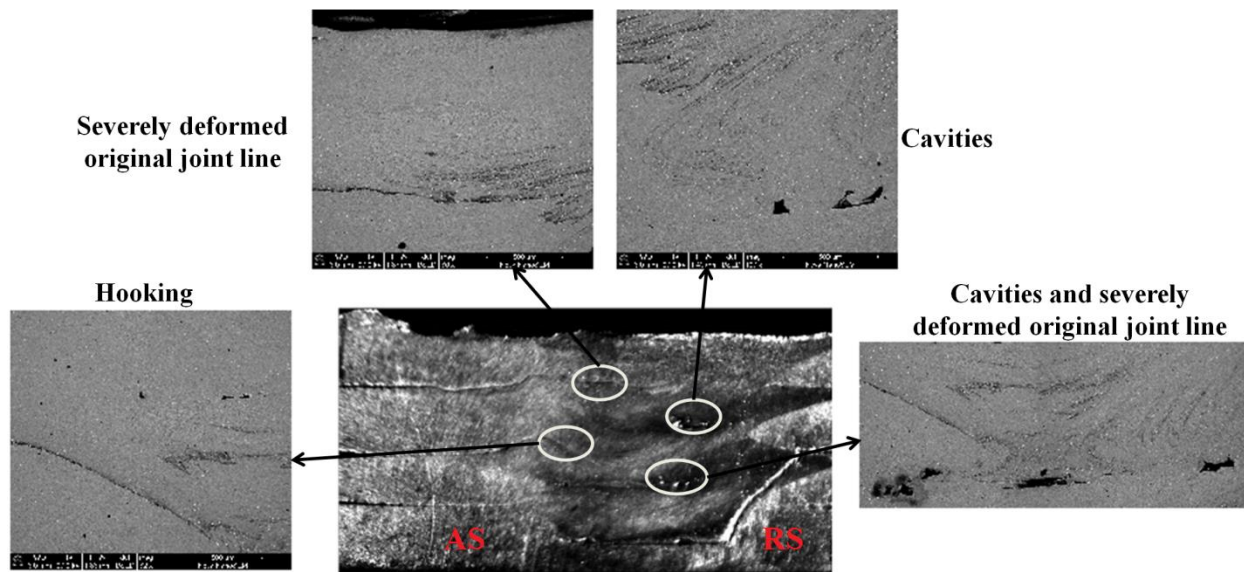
Defects in the 1400 /102 build specimen. The TMAZ-base metal interface at the bottom-right of the picture shows debonding.
